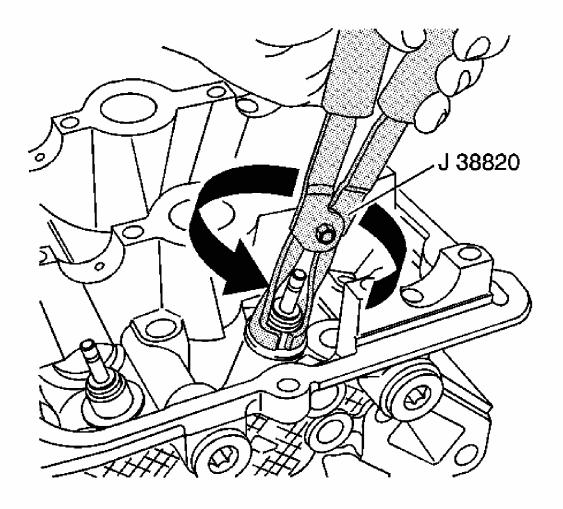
Using J 38820 To Replace Valve Seal Courtesy of GENERAL MOTORS CORP.
